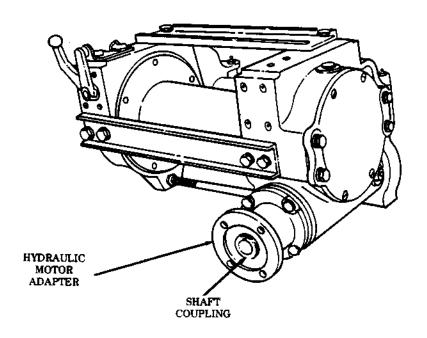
Front Winch Assembly (Without Level Wind and Cable Tensioner) (M939 Series Vehicles).
